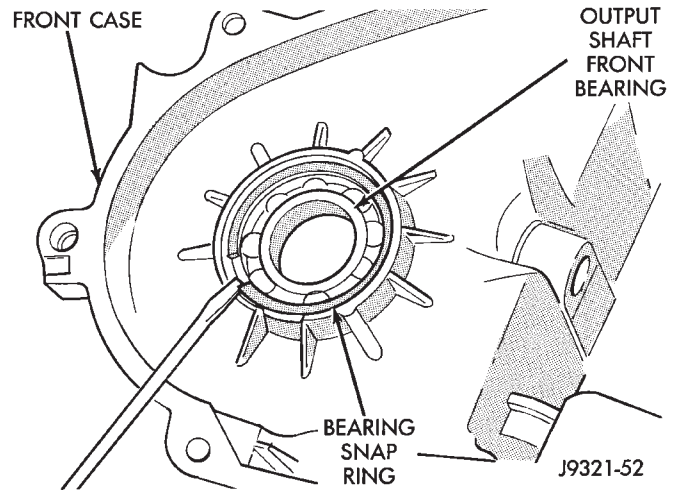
Output Shaft Front Bearing Snap-Ring Removal
